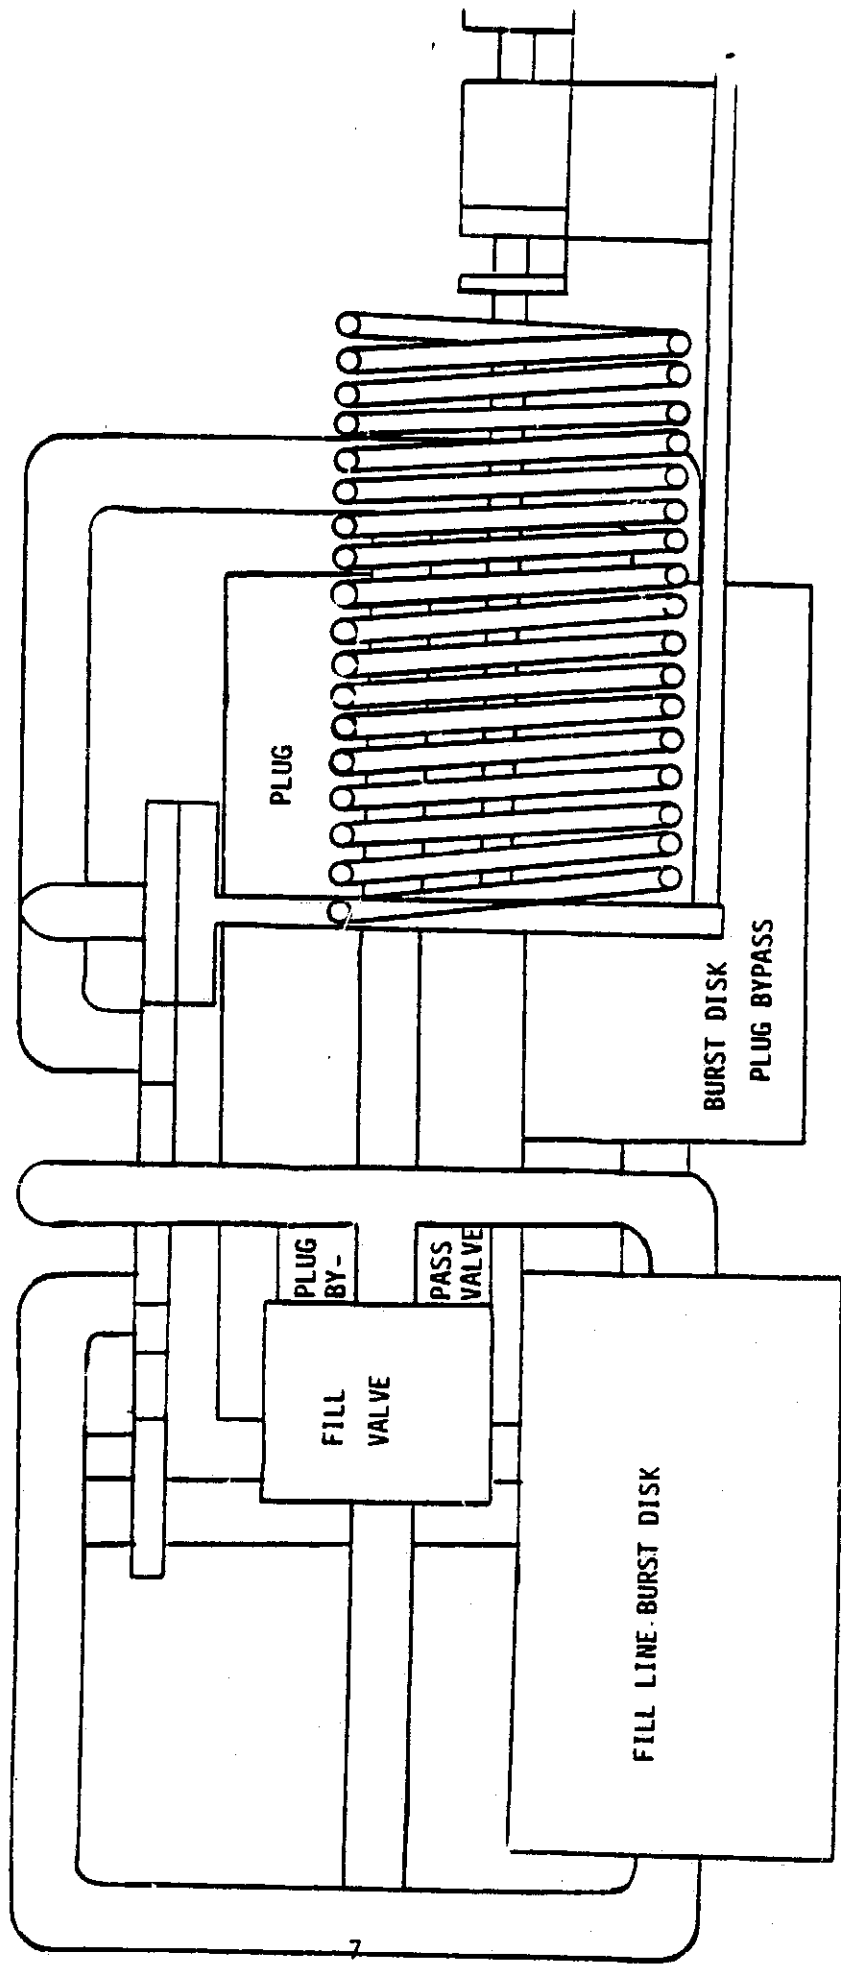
Side view of transfer assembly valving-plumbing layout. (Preliminary for planning purposes only).
